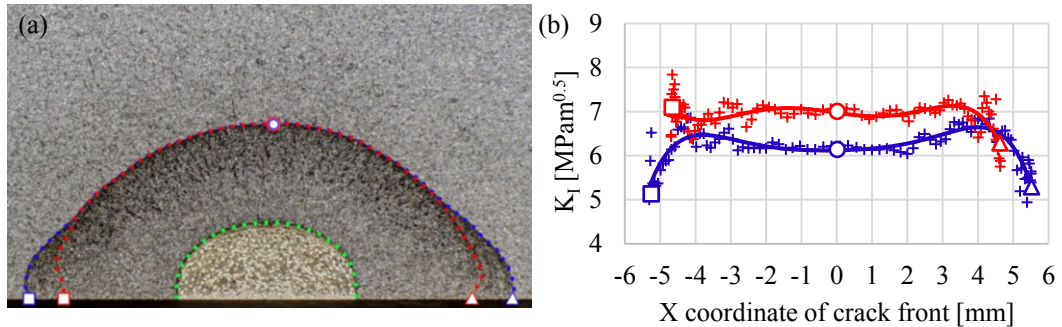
The typical fracture surface with marked lines, green – initial notch, red – crack arrested in the inner direction, blue – final crack front (a), SIF evolution along the crack fronts (b)
